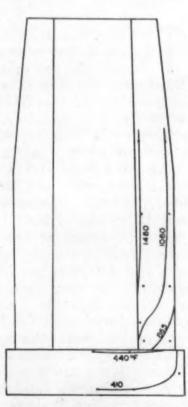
Isotherms in Cast Iron Mold and Copper Stool after 60 min. Duration of Test.
